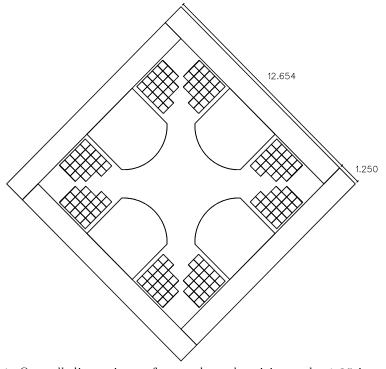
Overall dimensions of a quadrupole with a yoke 1.25 in. thick.
